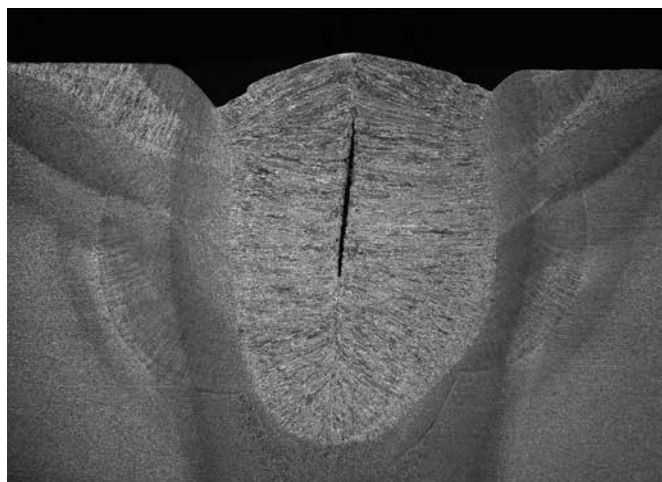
Hot cracking of a weld in austenitic stainless steel.
